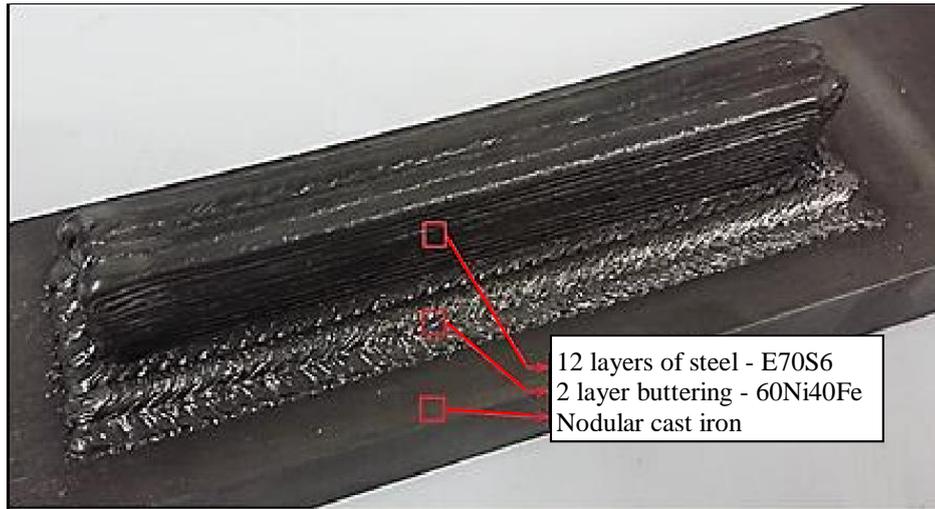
Perspective image of the steel wall built over a nodular cast iron with two intermediate buttering layers of iron-nickel alloy
